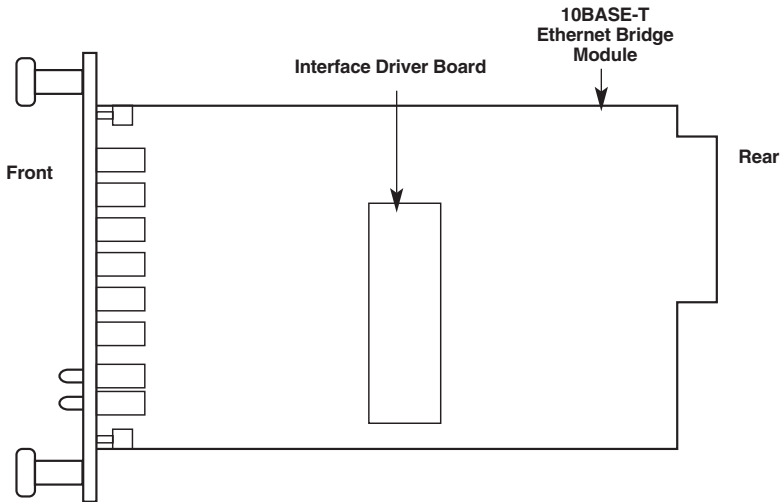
Interface driver board mounted on a ME0003C or ME0004C front card.
